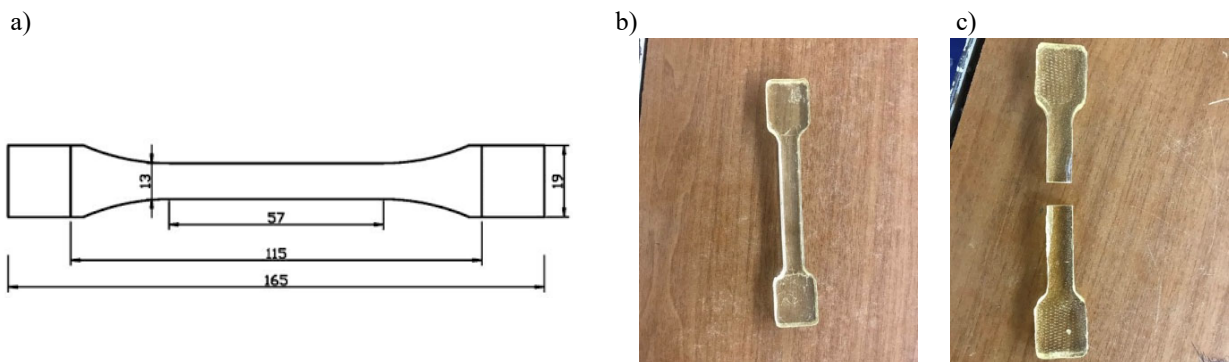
Tensile test specimen: a) scheme, b) before test, c) after test
